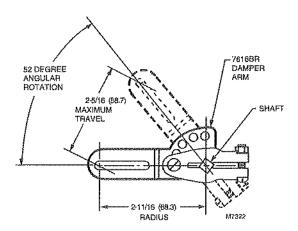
, 7616BR Damper Crank Arm can be attached to actuator shaft to drive a damper when valve is open.
